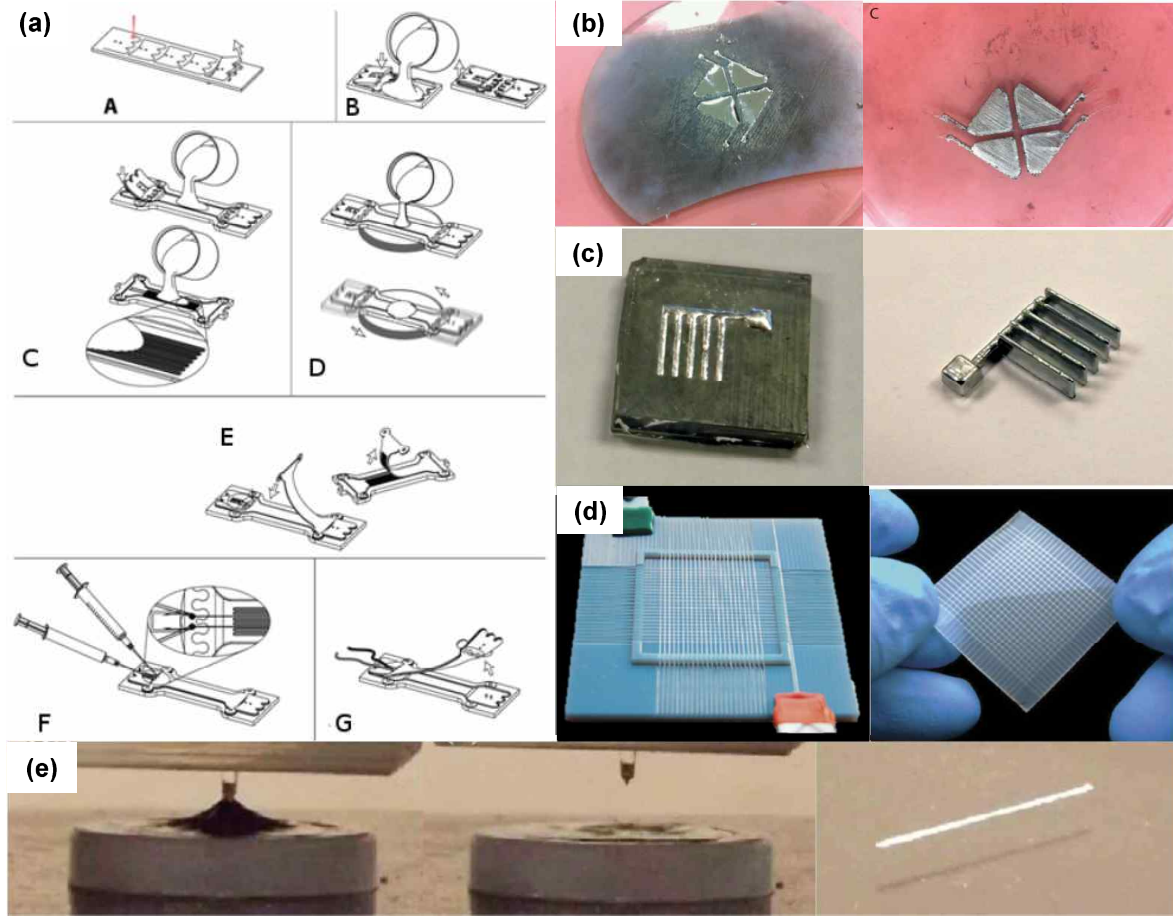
Fabrication methods for eGaIn-based soft sensors: (a) casting, bonding, and injection [117], (b) mask deposition [148], (c) freeze casting [52], (d) direct filament casting [105], and (e) microcontact printing [171].
